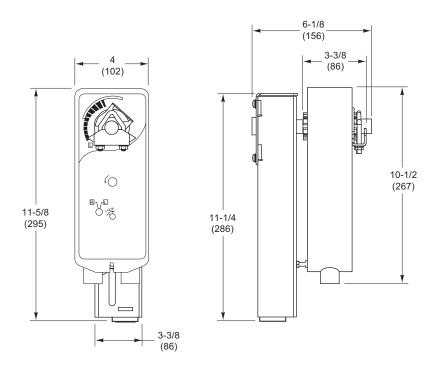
Mx41-715x-2xx or Mx41-707x-2xx Linked Actuator Assembly With AV-602 Linkage.
